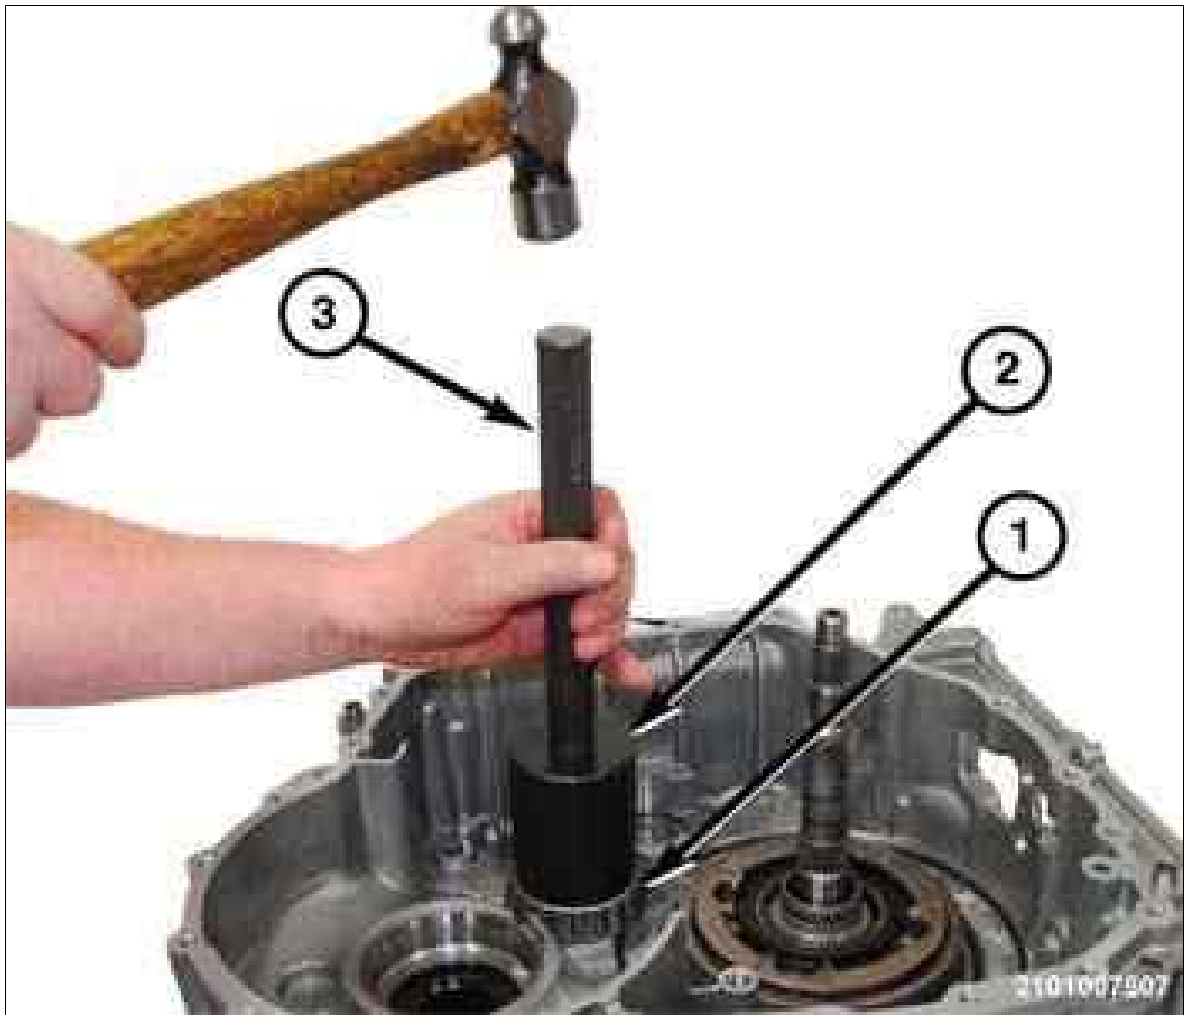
Thrust Bearing & Annulus Gear 1 Planetary Hub
